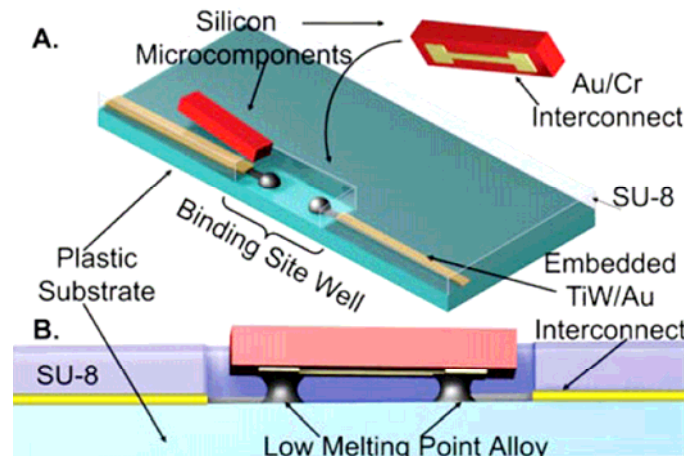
Details of the self-assembly process. The capillary forces resultant from the molten alloy hold the part and template together.
